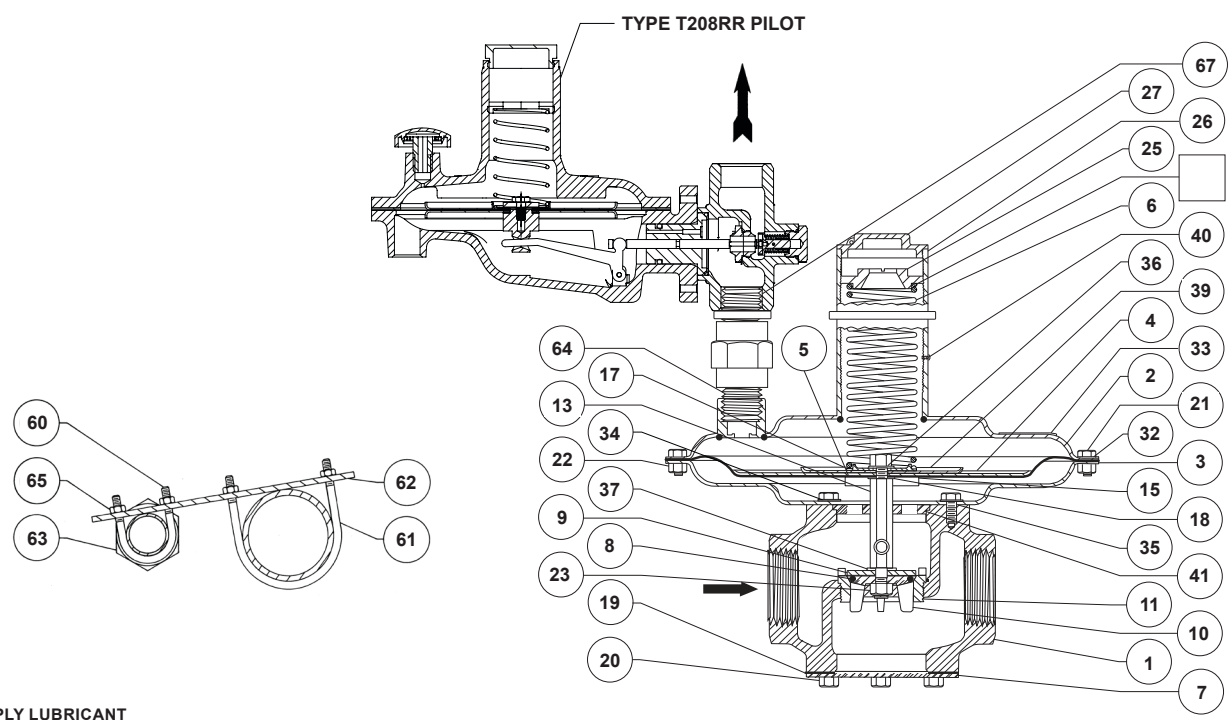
Type 66RR Main Valve and Pilot Mounting Parts
